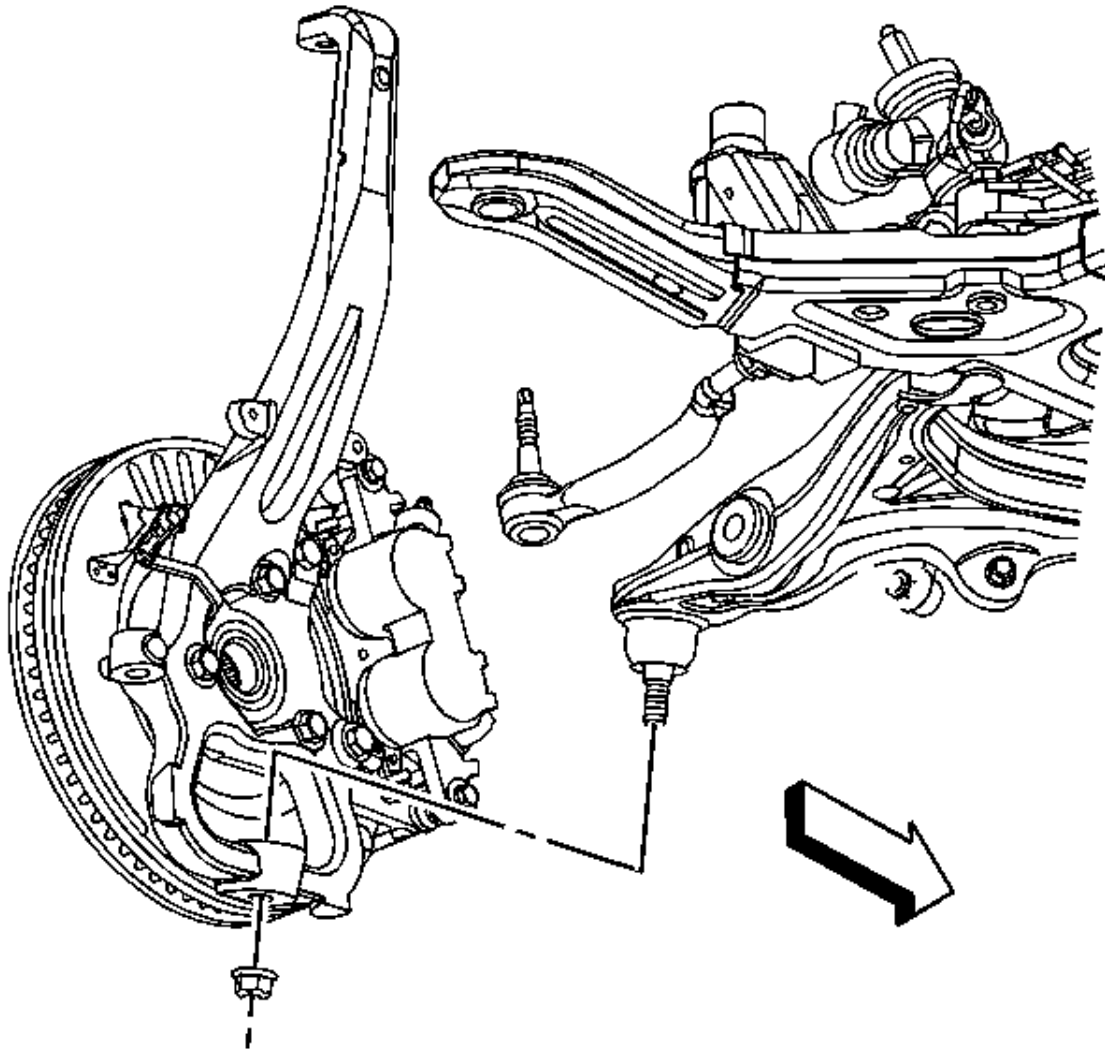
View Of Lower Control Arm Ball Stud-To-Steering Knuckle Retaining Nut
